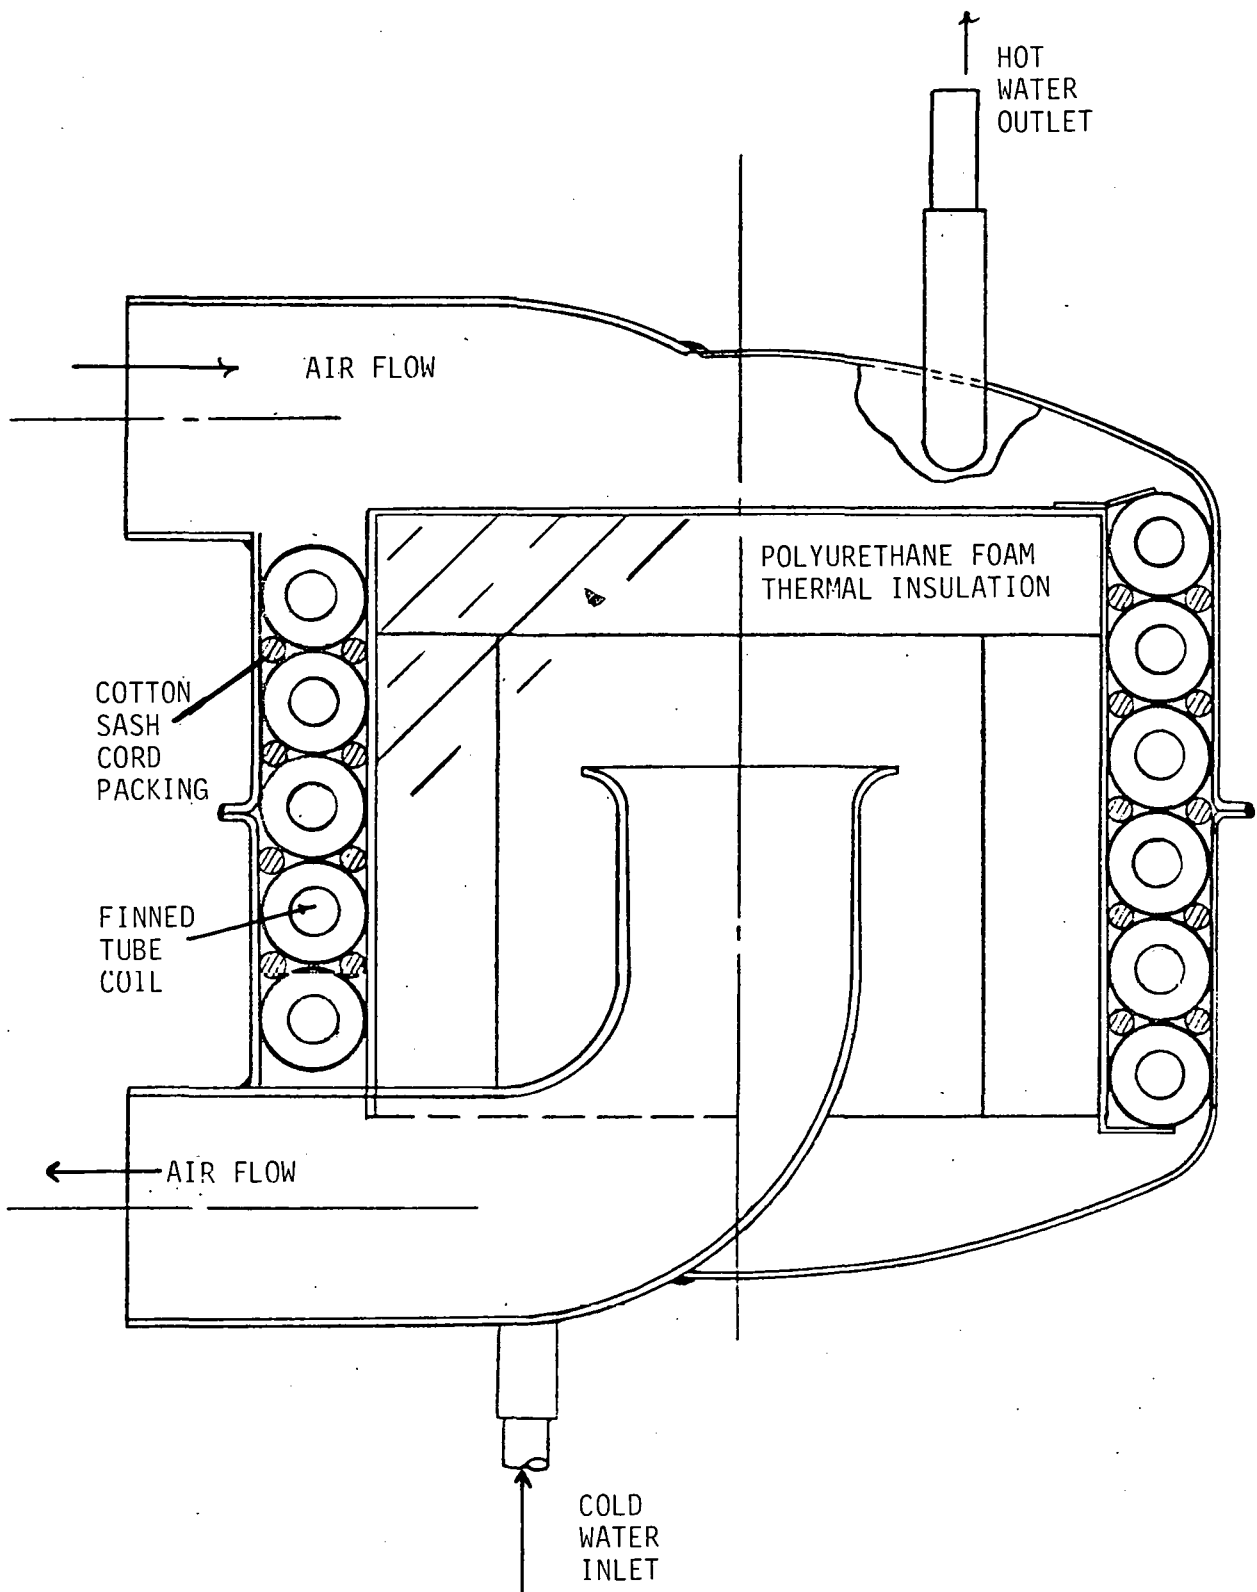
Prototype Air-Water Heat Exchanger Assembly
